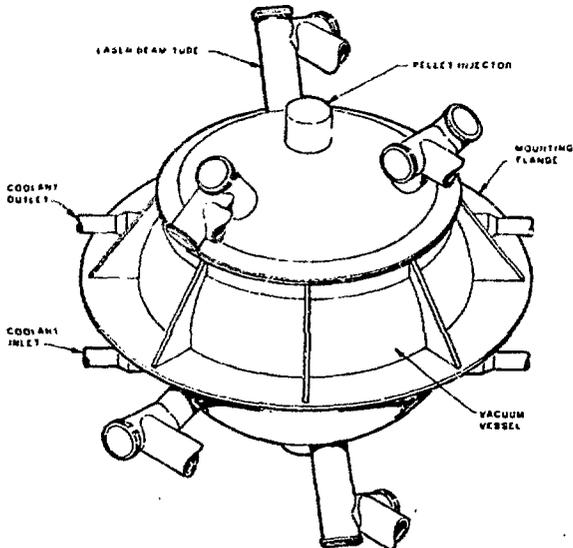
Vacuum Vessel for the Laser Fusion Hybrid Reactor
